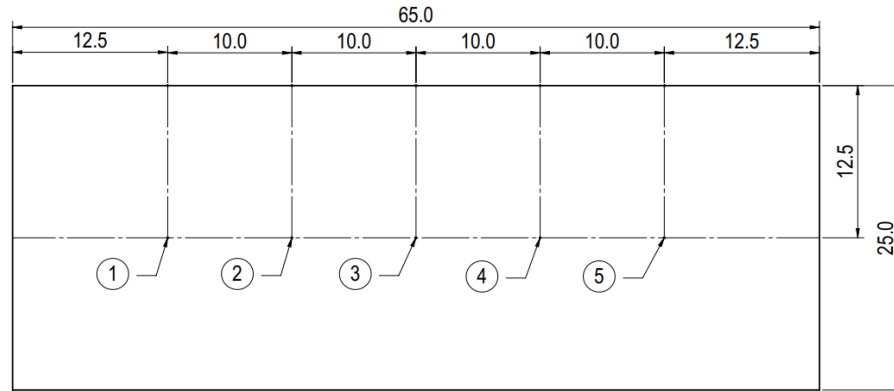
Schematic of measurement points on the ASTM D2240 test specimen
